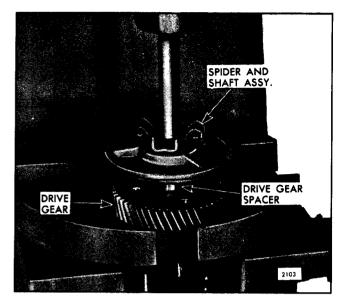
Installing Drive Gear on Spider and Shaft Assembly
